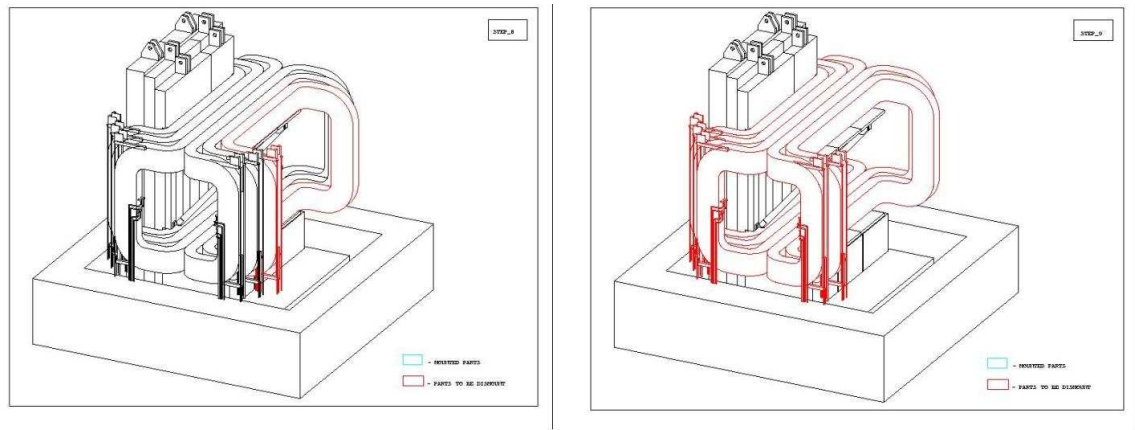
SM3 Analysis Magnet disassembly steps 9 (left) and 10 (right)
